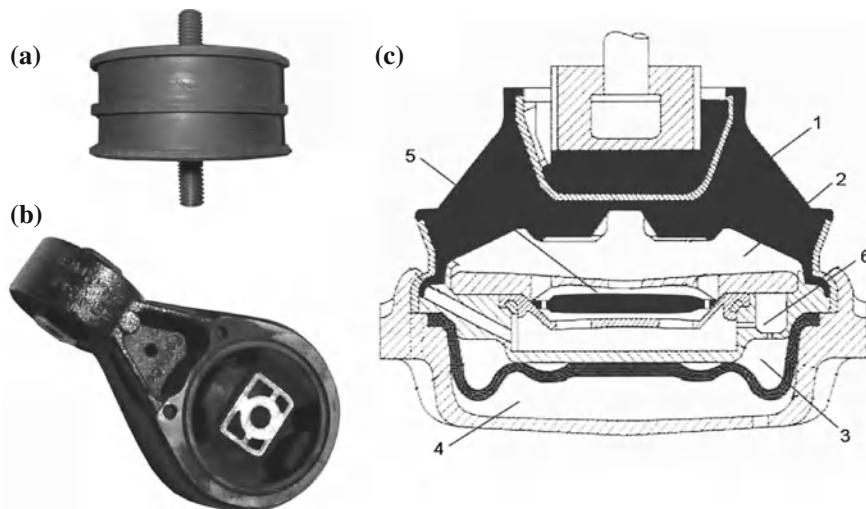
Rubber engine mounts. a Rubber mount for *low loads*; b elastic rod for torque reaction; c rubber mount for *high loads* with hydraulic damper
